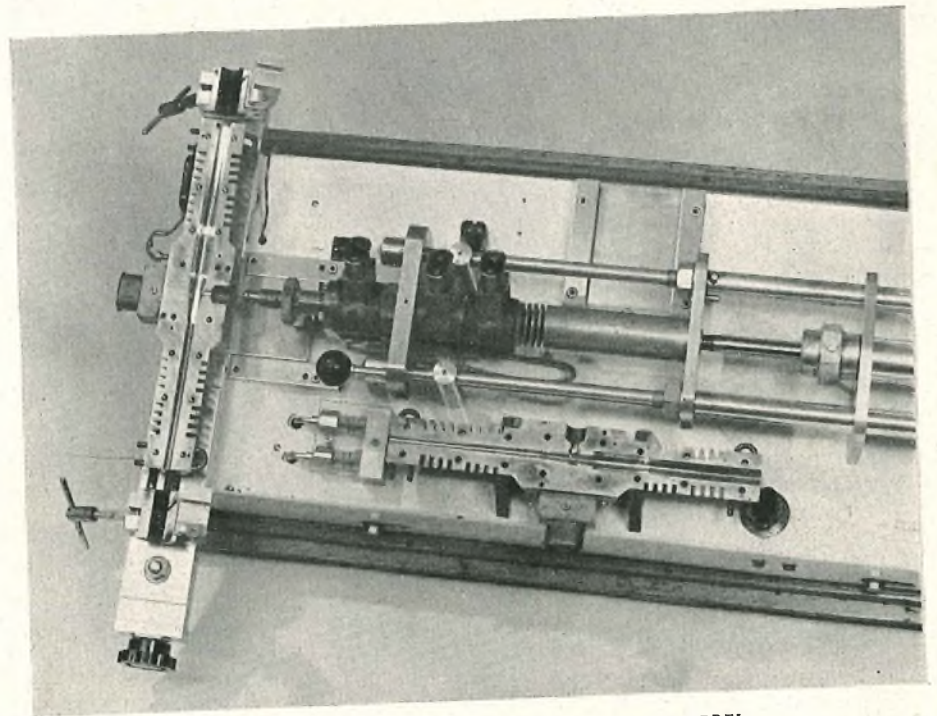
JOINTING MACHINE SHOWING CLOSE-UP OF BARREL
